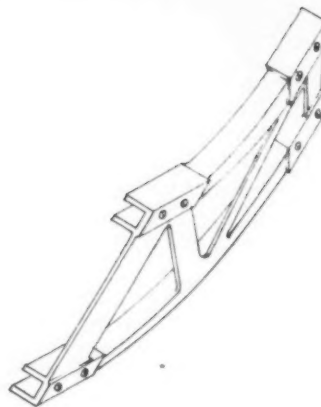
Original "gooseneck" assembly. Weight 67½ lbs.
